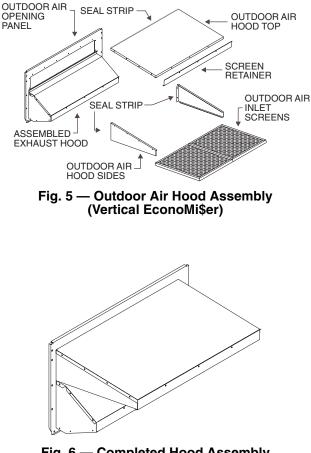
Completed Hood Assembly (Vertical EconoMi\$er)
